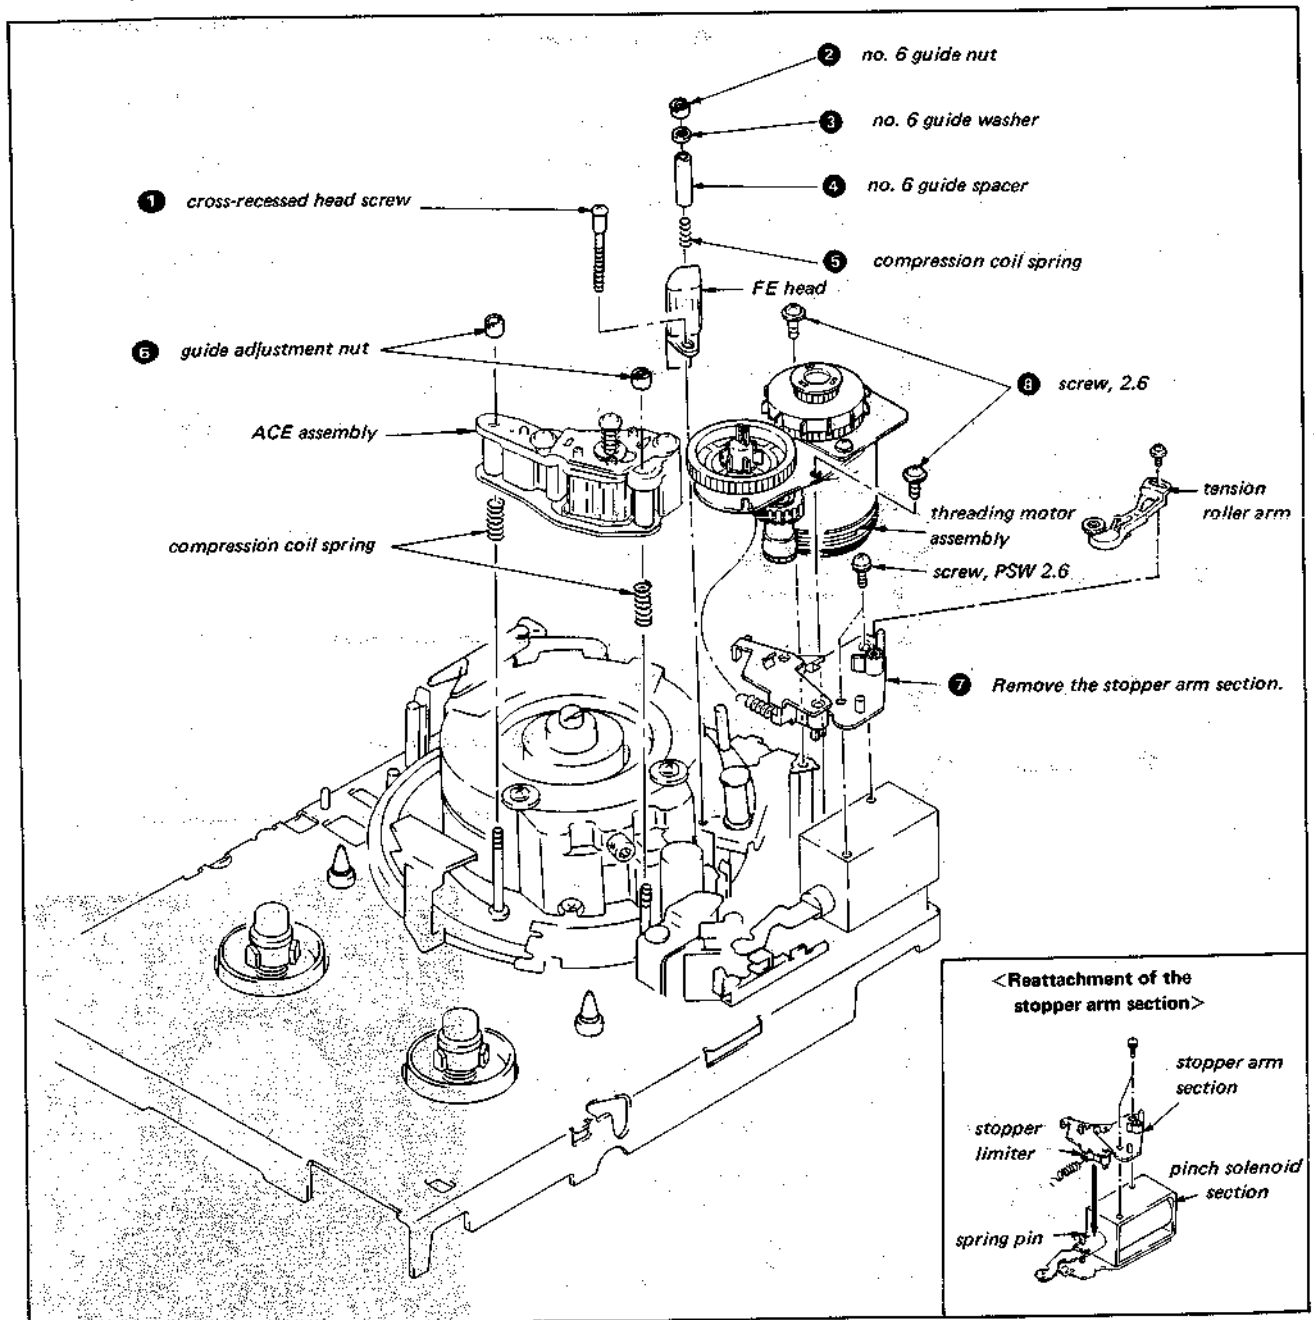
Removal of the ACE assembly, FE head and threading motor.
